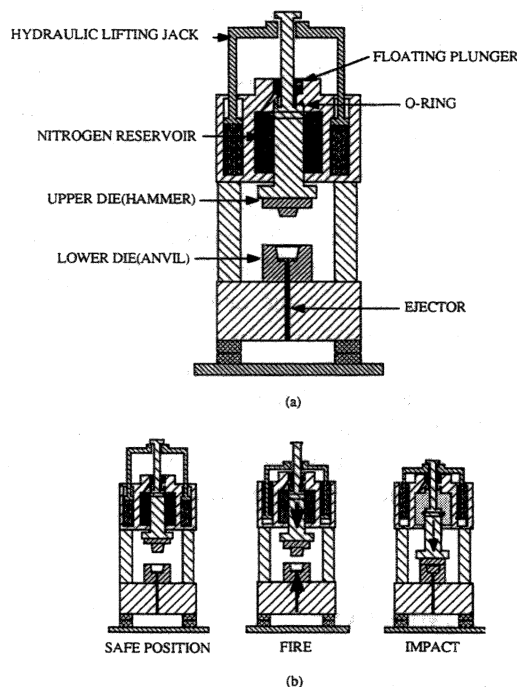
Schematic of high-velocity forging machine: (a) machine components; (b) operation sequence.
